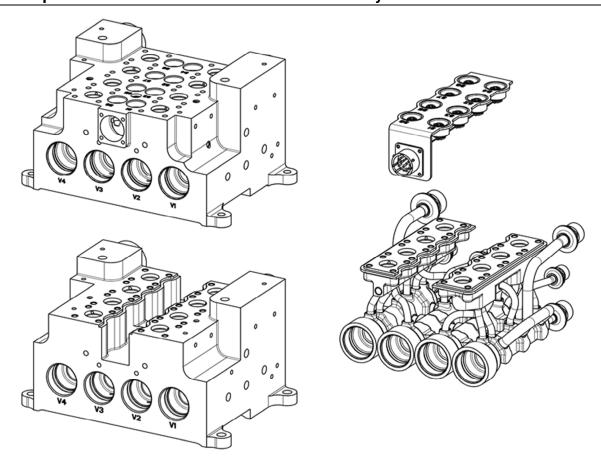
Separated electric unit to use on both conventional valve body and SCHWOB
